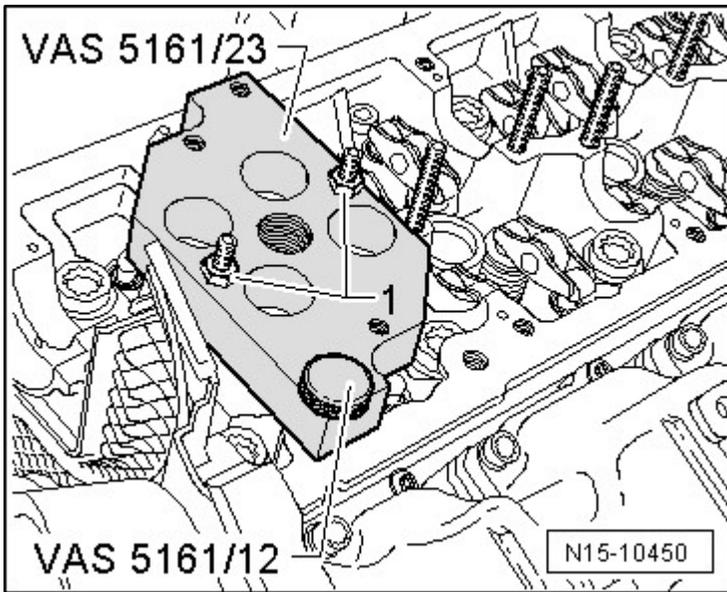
Identifying Guide Plate VAS 5161/23 Secured Using Knurled Screw VAS 5161/12
